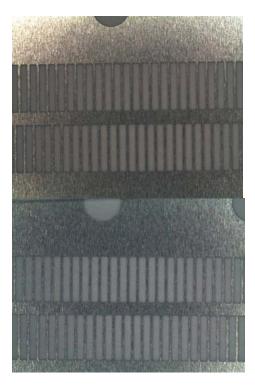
Restrictor inspection: upper one (initial), lower one (after test)
